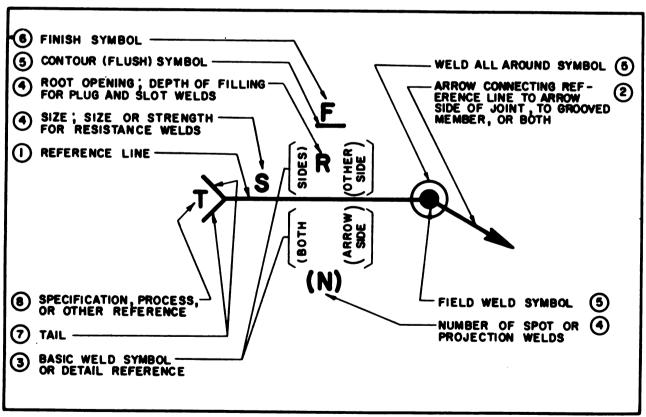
Standard location of elements of a welding symbol.
